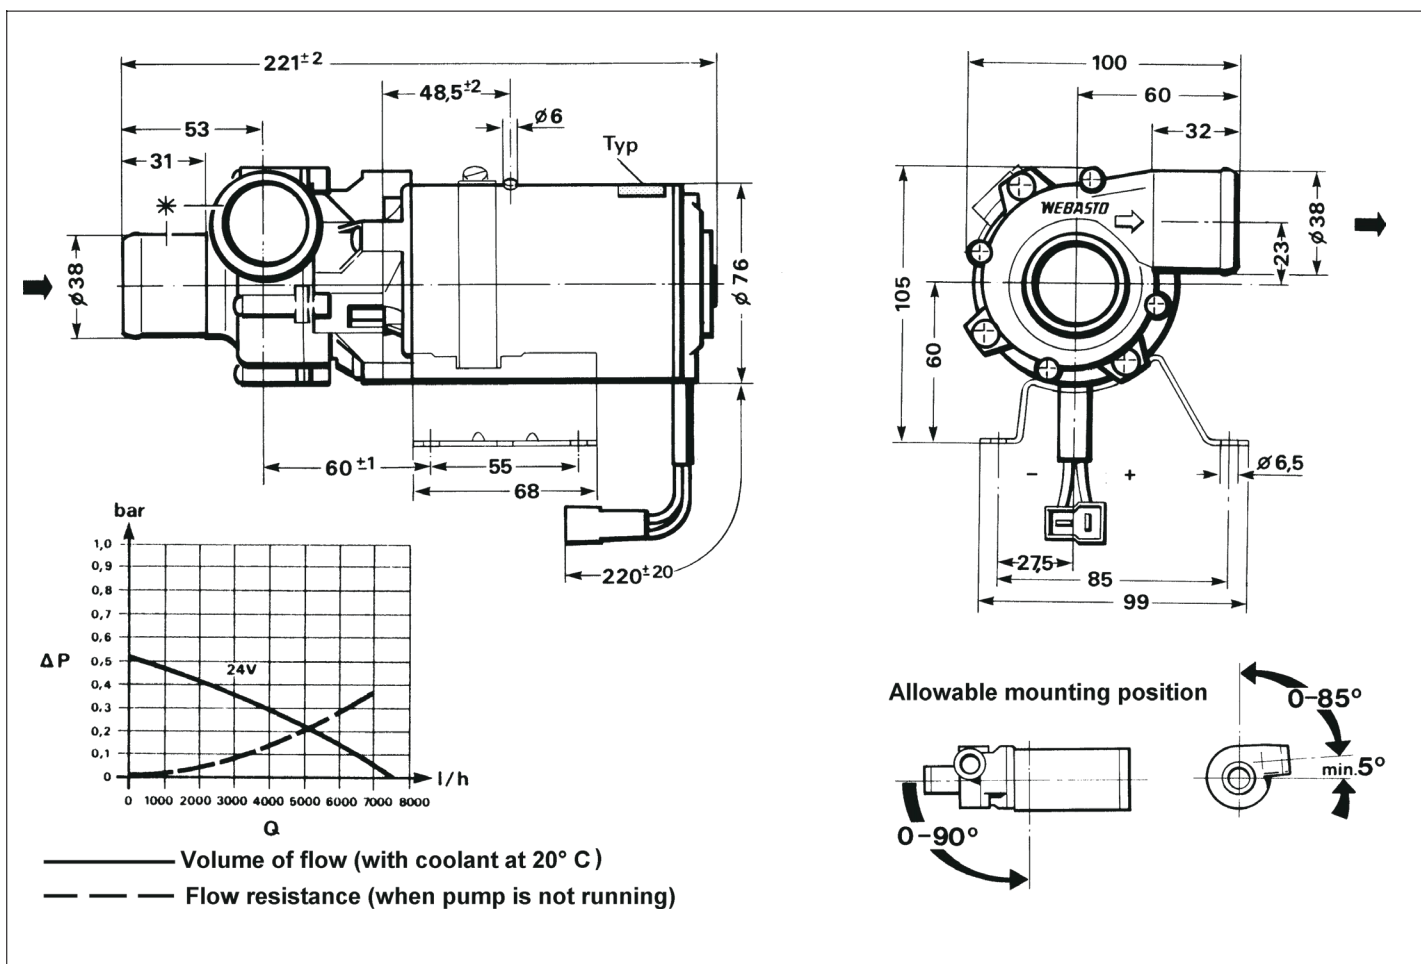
Coolant Circulating Pump Assembly - U 4814
